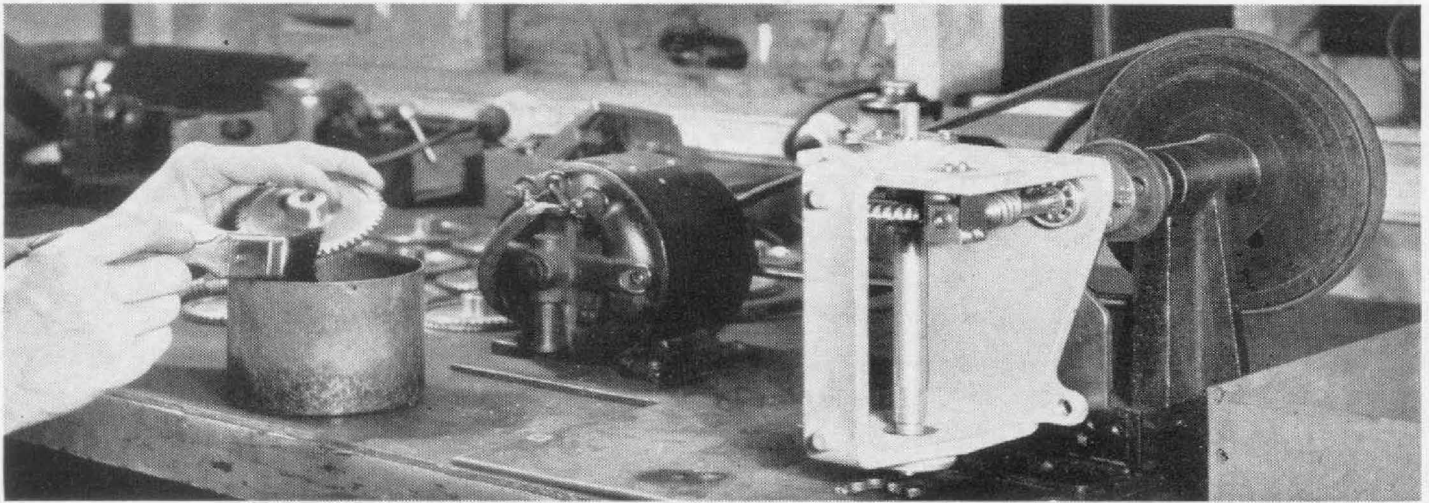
At the right is shown the motor-driven assembly for "wearing-in" the worm and gear. After this is finished, the gears must be washed in gasoline, as shown at the left, to remove the fine particles of grinding compound
